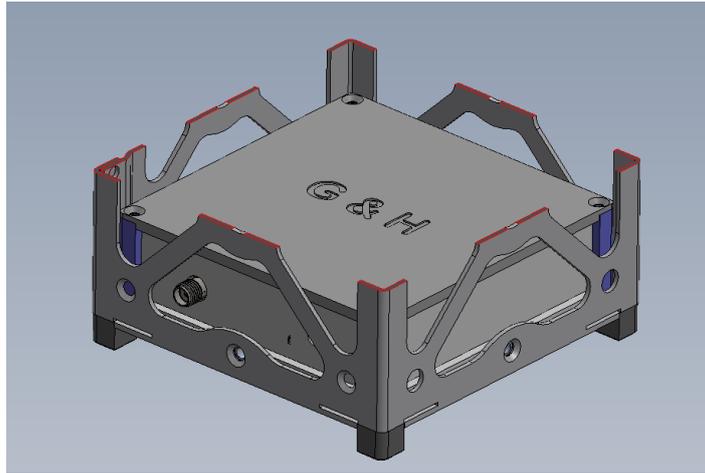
PERSEUS-LP-LE-C-LR mechanical CAD design set out in a 1U CubeSat skeleton
